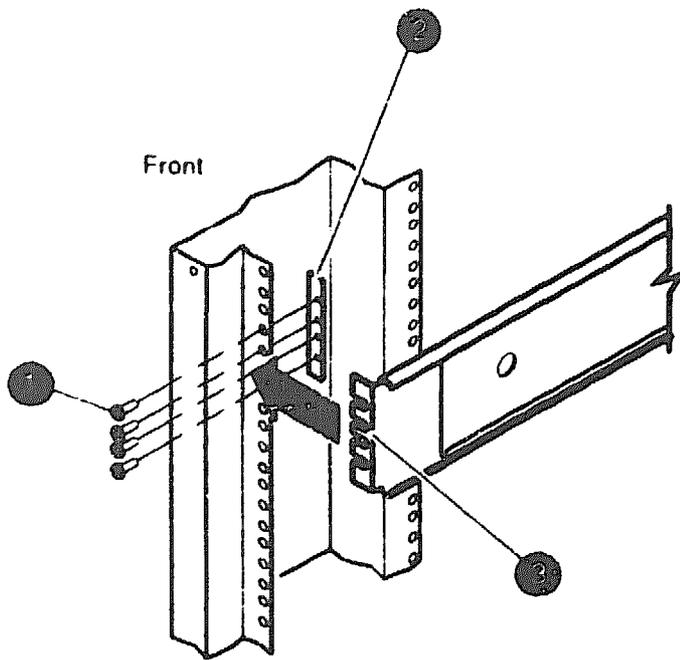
Attaching Rear Bracket and Slides to Cabinet
